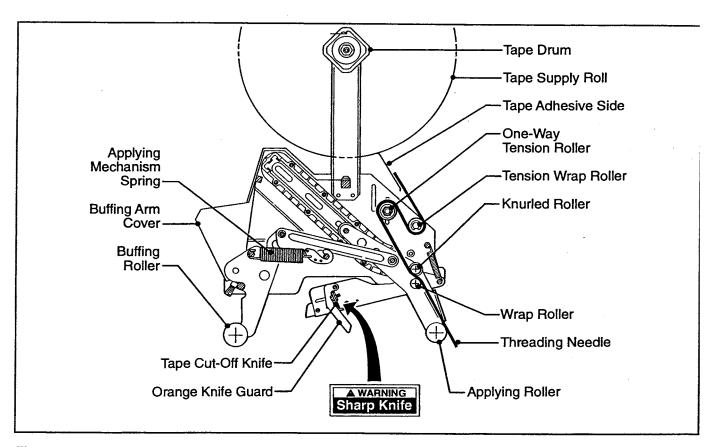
Taping Head Components/Threading Diagram, Upper Head (Left Side View)
